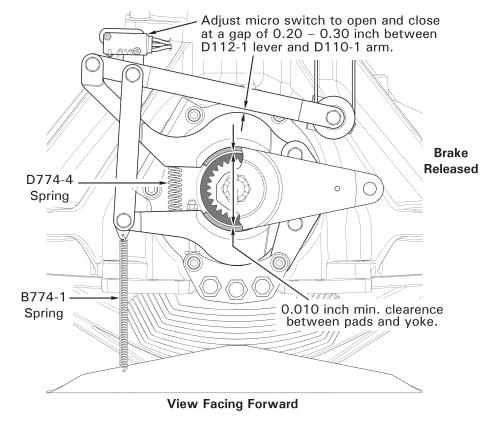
ROTOR BRAKE ADJUSTMENTS AND CLEARANCES
